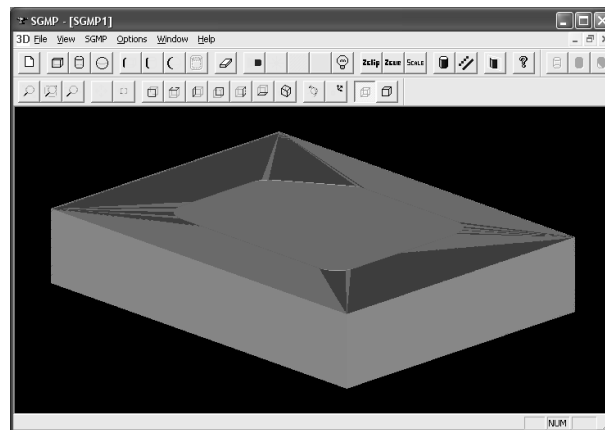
Desired part and shape of the selected workpiece in the workspace.
